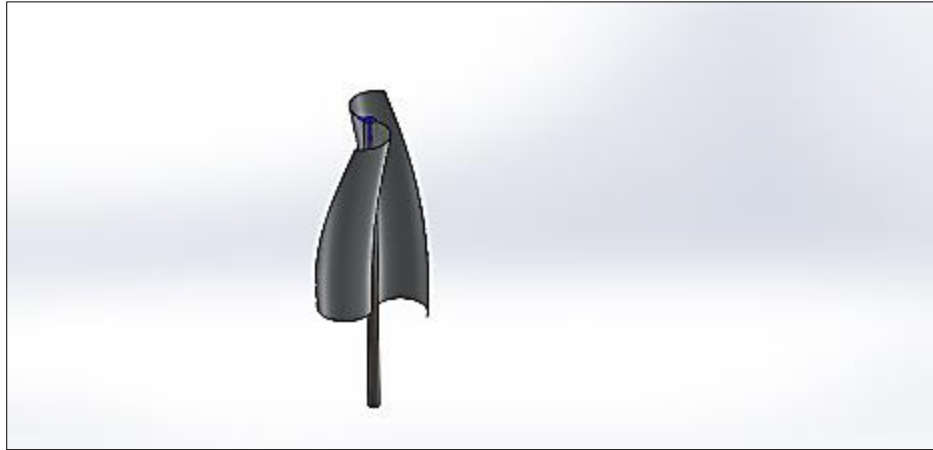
CAD Modelling of Helical Blade in a Vertical Axis Wind Turbine [4]
